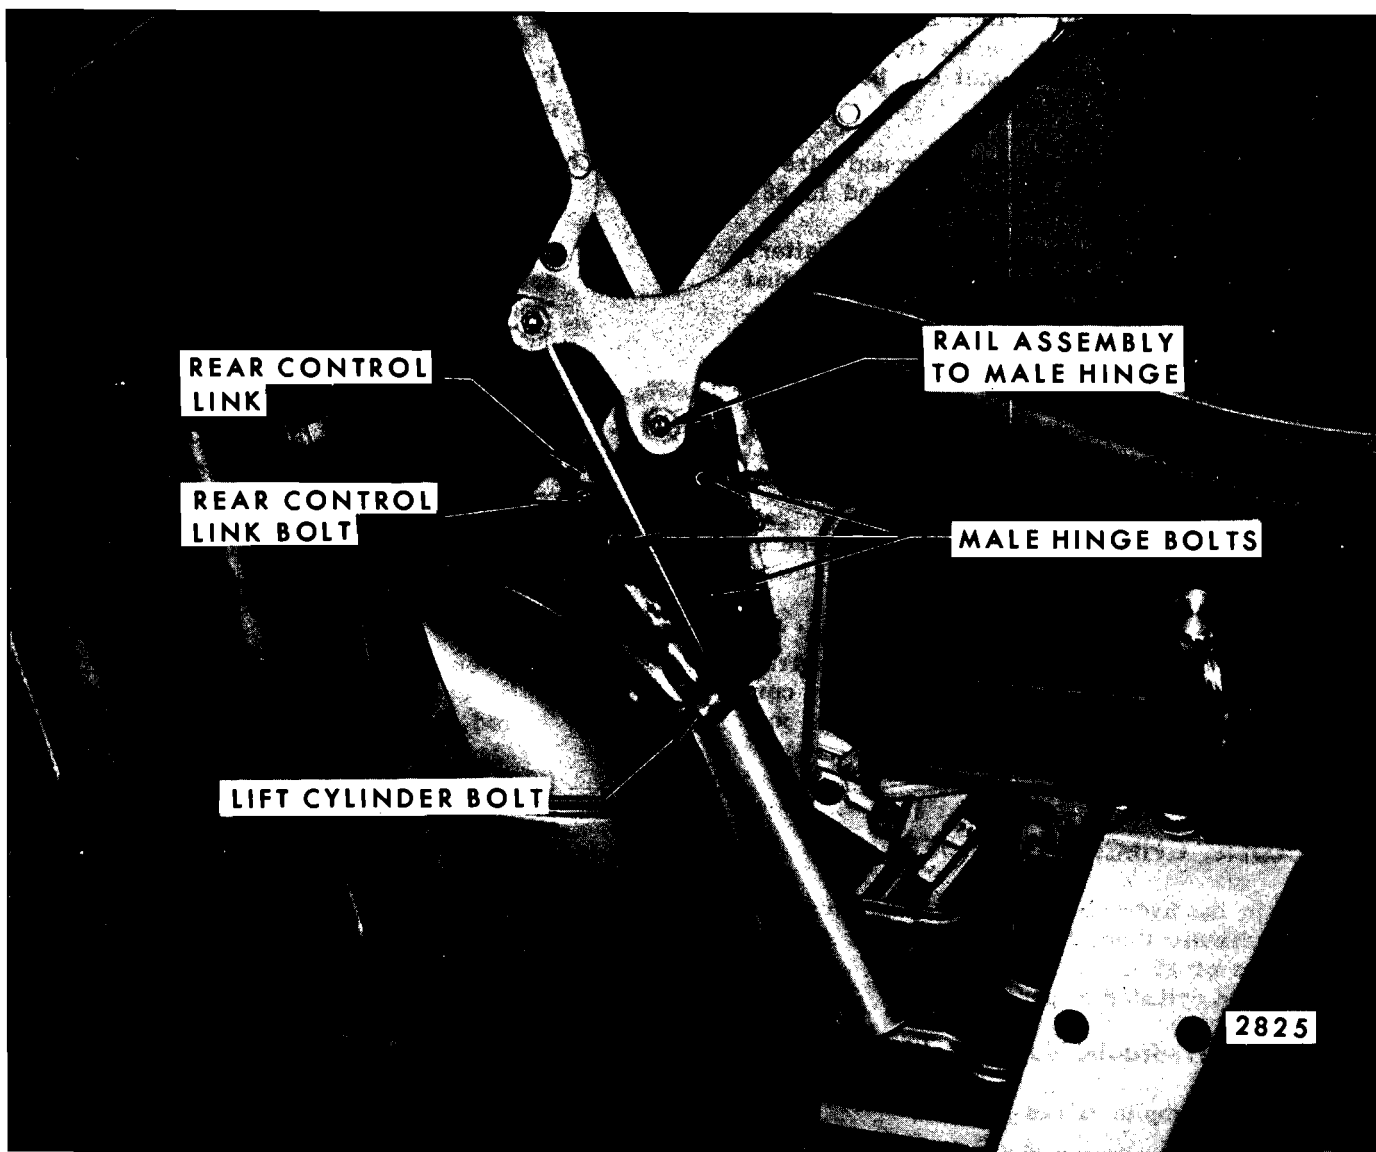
Folding Top Linkage Attachment - "A" Styles Shown, "B & C" Typical
